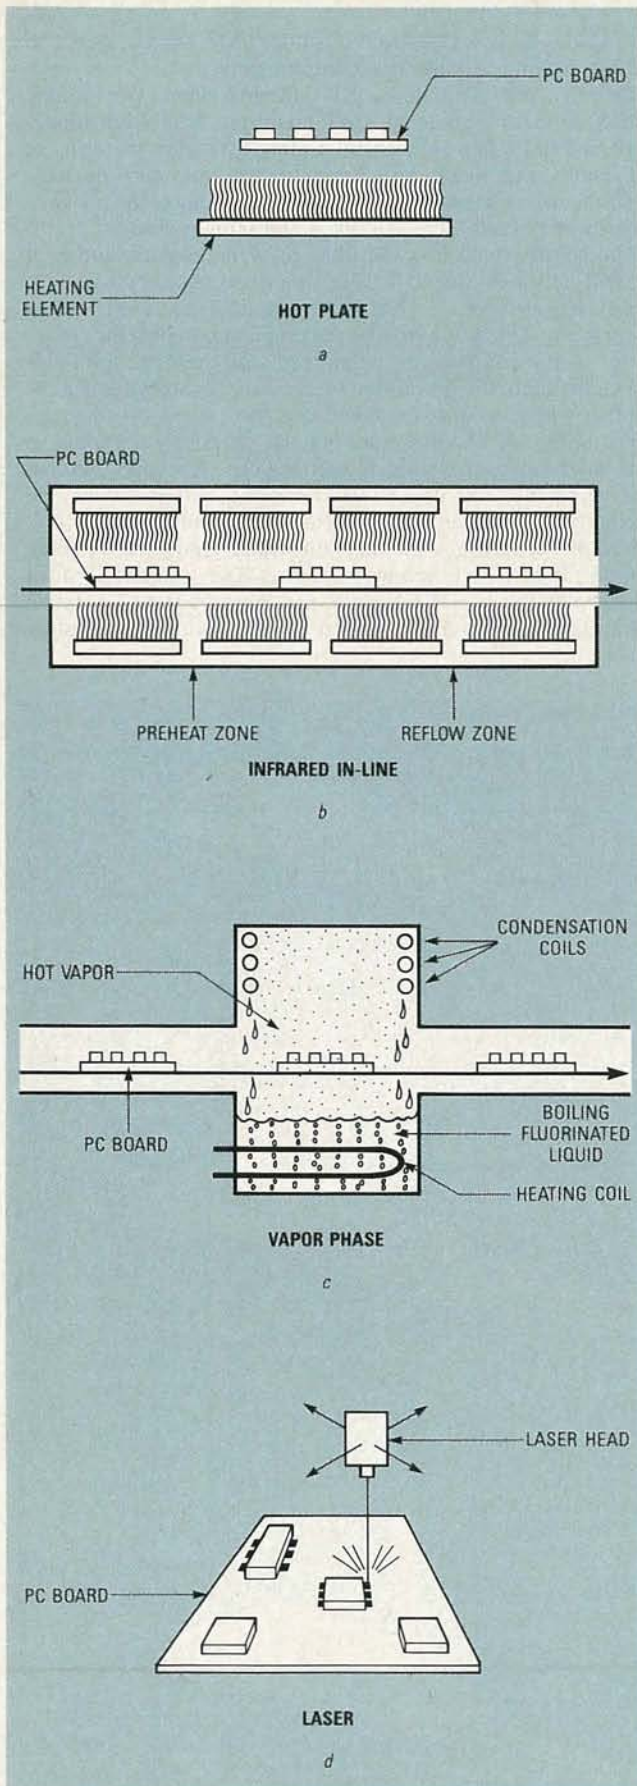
REFLOW SOLDERING METHODS: Hot plate reflow soldering is shown in *a*, infrared reflow soldering is shown in *b*, vapor-phase reflow soldering is shown in *c*, and laser reflow soldering is shown in *d*. The laser method causes the least component heating. (*d*) causes the least component heating.
